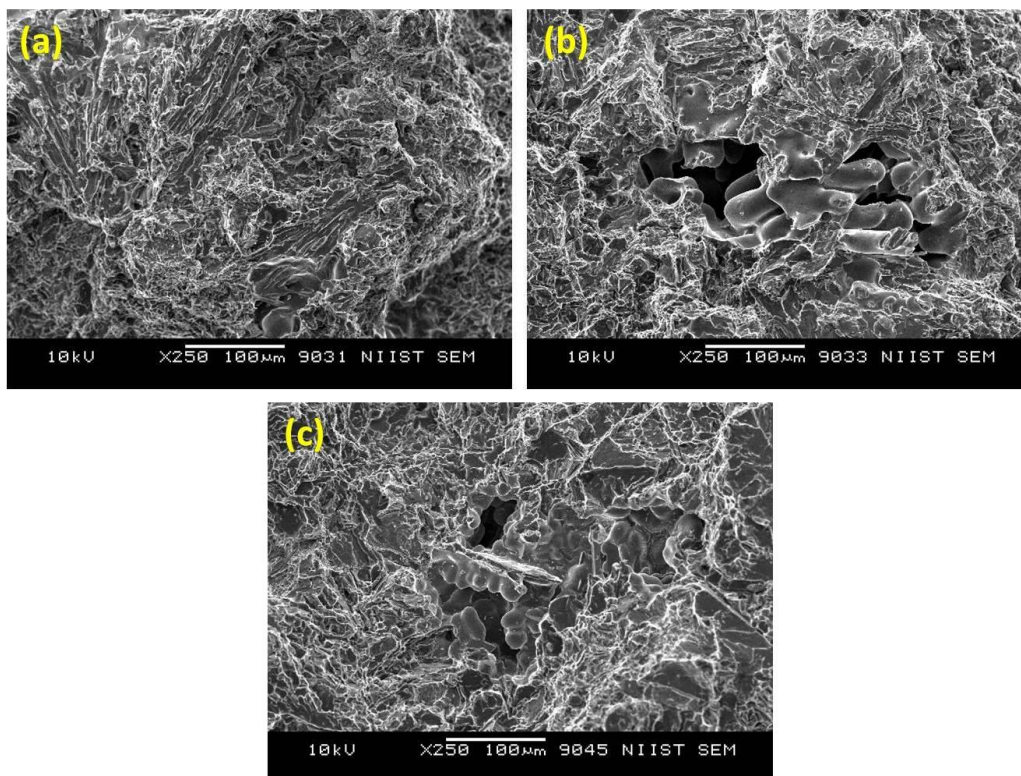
SEM analysis of fracture surface of A390-1.5 wt. % Mg-0.03 wt. % Zr (a) outer specimen (b) middle specimen and (c) inner specimen
